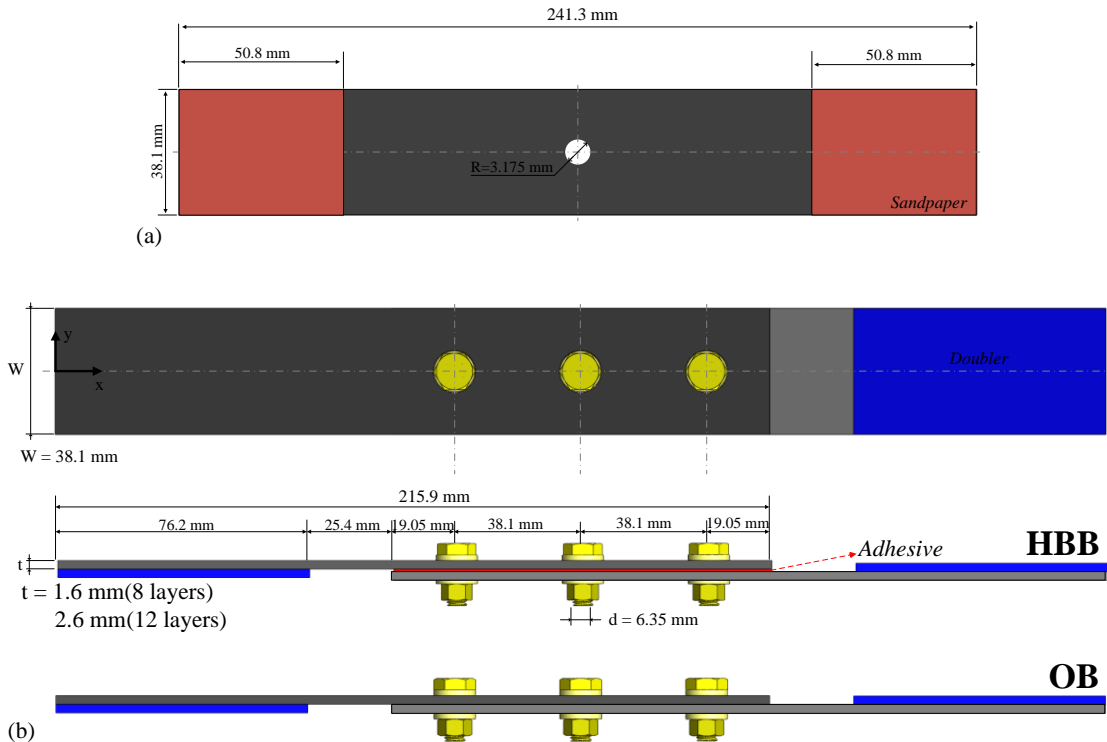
Specimen geometry and dimensions for (a) OHT and (b) OB and HBB SL joints.
